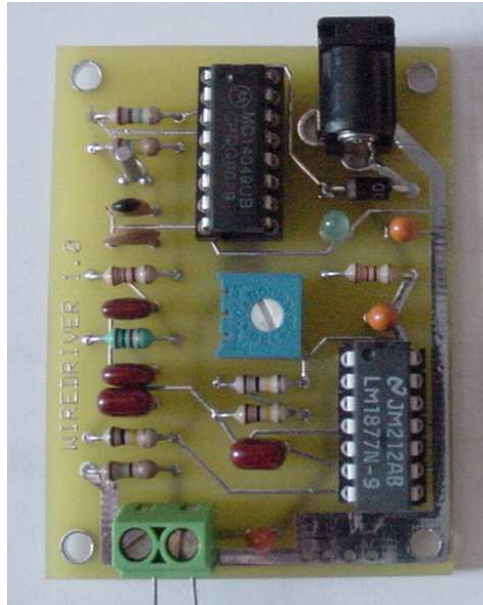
PCB (double-sided). (See Figure 2 for point-to-point soldered version.)
